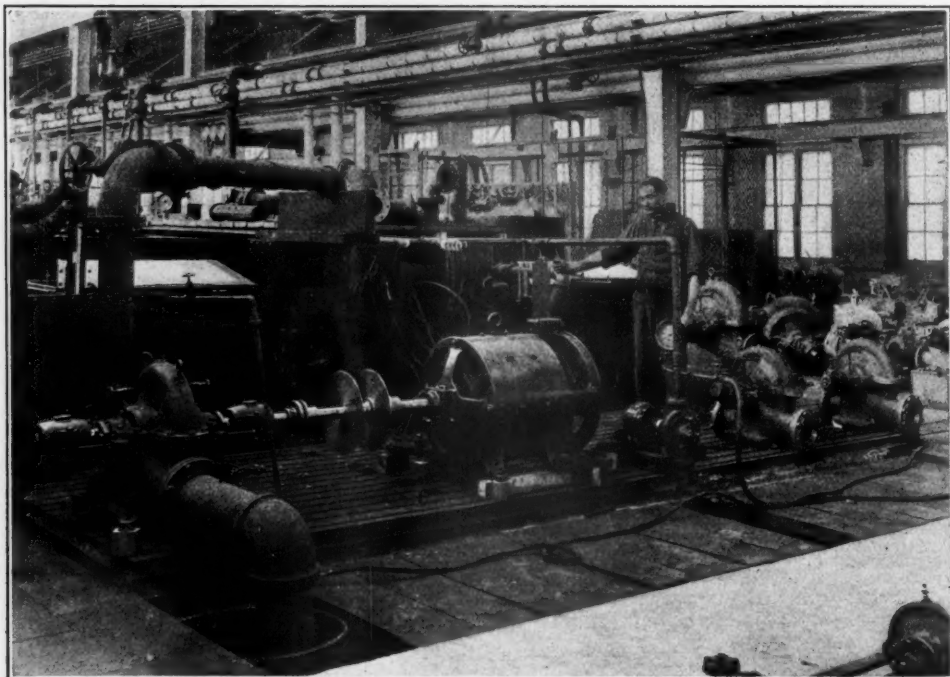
REAR VIEW OF CENTRIFUGAL PUMP DYNAMOMETER TEST.
